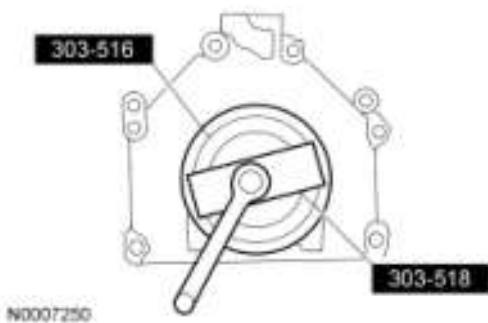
Using Special Tools To Install New Crankshaft Rear Seal
